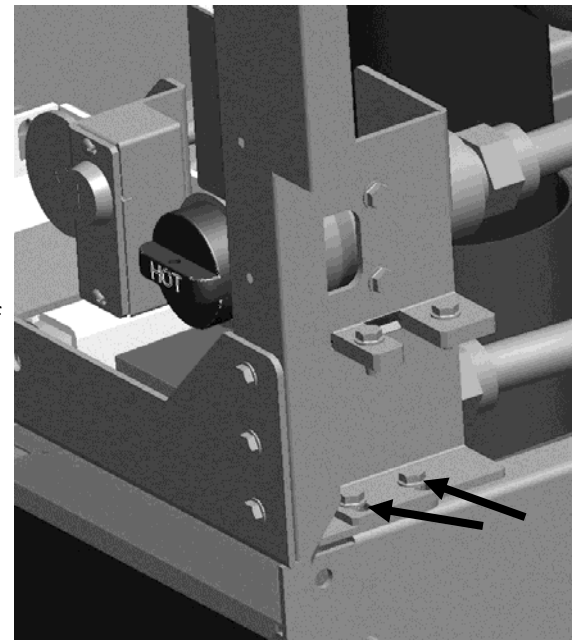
Install the pre-filter assembly, using existing holes. See Arrows.
